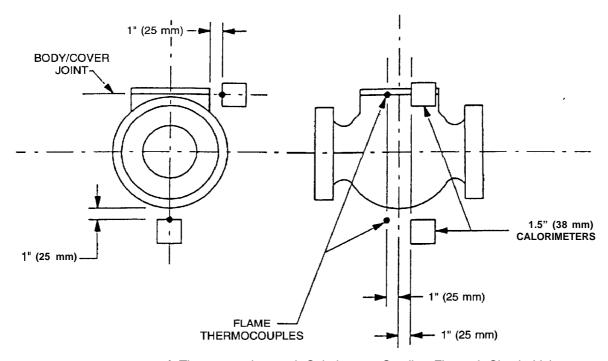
Location of Thermocouples and Calorimeters-Smaller Flanged Check Valves
